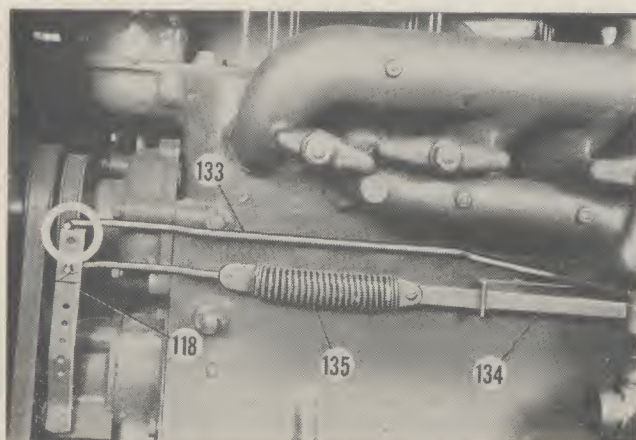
Rod which connects carburetor throttle to governor fork lever should be adjusted to $\frac{1}{16}$ inch over-travel, that is, it should be $\frac{1}{16}$ inch longer than the center distance. Illustration is of 88 tractor but Super 99 is basically similar.
